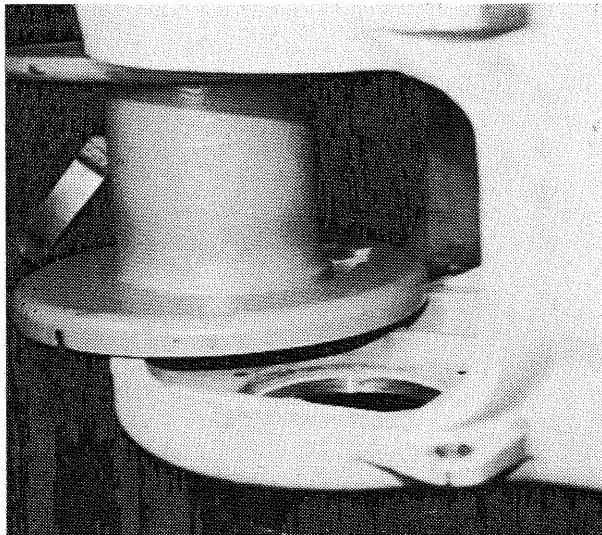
Removal of Drum, Shaft, & Ring Gear (2 of 4)
